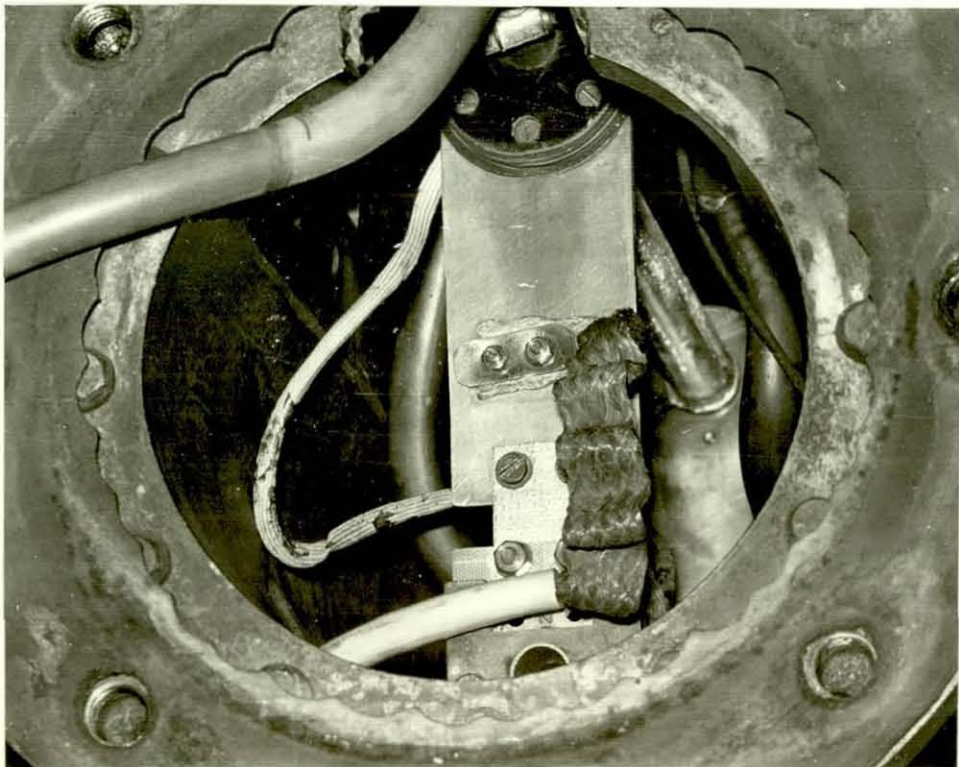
(b) View into Condenser Shell with End Cover Plate Removed
